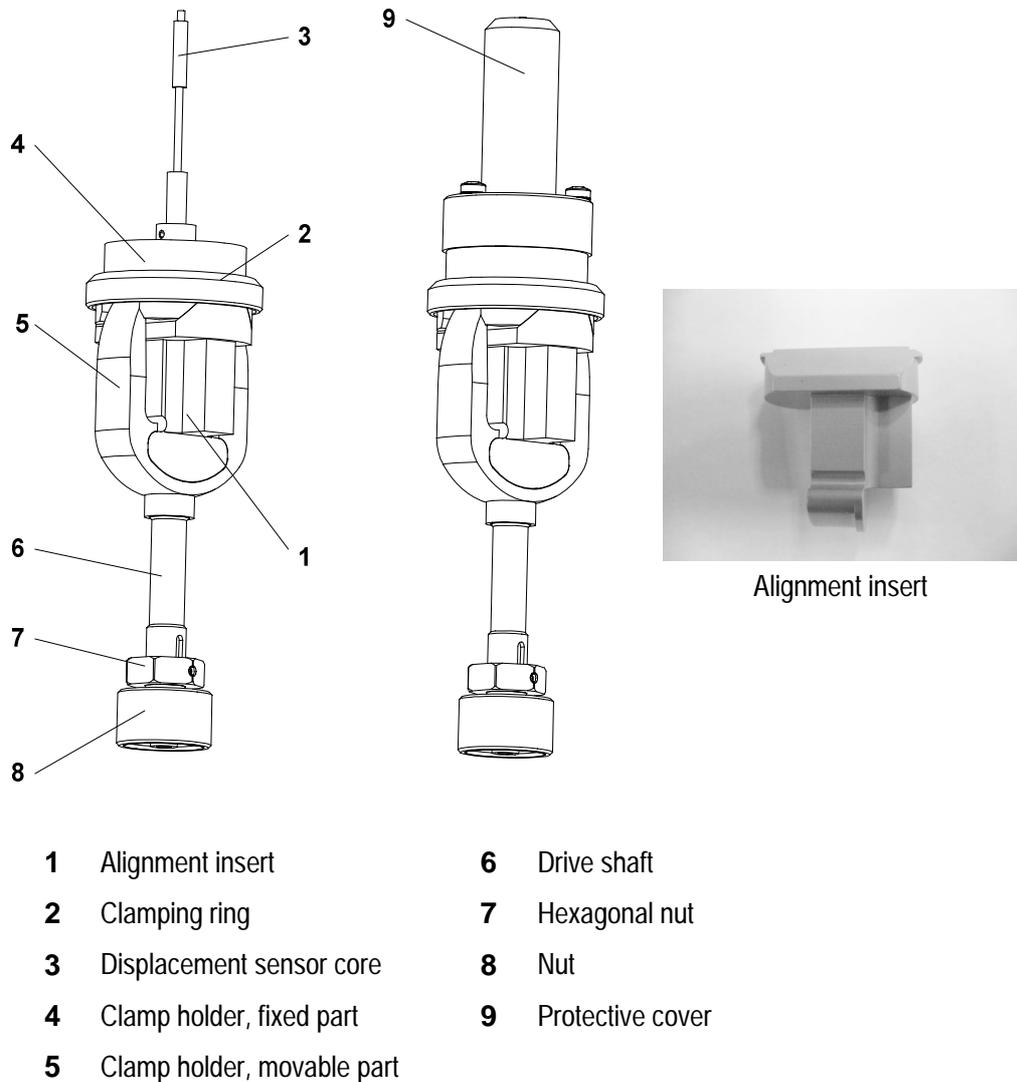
Large clamping assembly with alignment insert and protective cover
